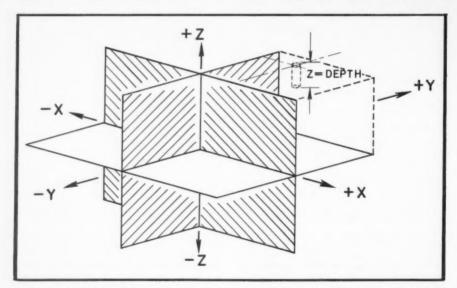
Three dimensional coordinates view showing depth as a measurement along the Z axis. On most machines the Z measurement begins at the end of the fully retracted
